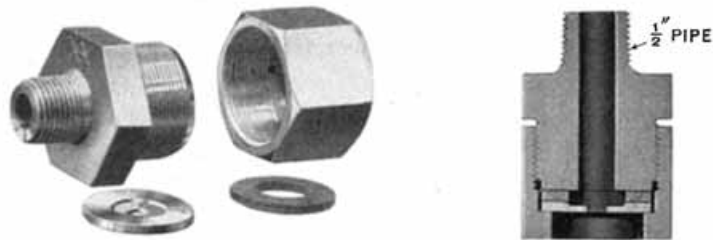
Disassembled View and Sectional View of Disc Holder with Disc
